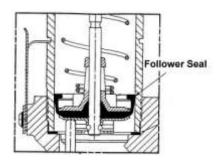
The Lip of the Follower Seal is Directed Toward Follower Handle (Cartridge Loading Position Shown)
